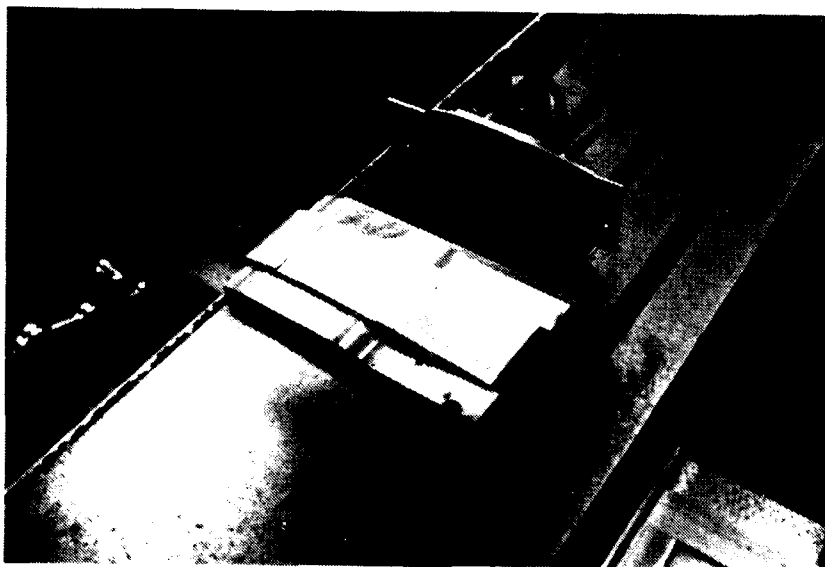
Machining Honeycomb Before Expansion (HOBE).
